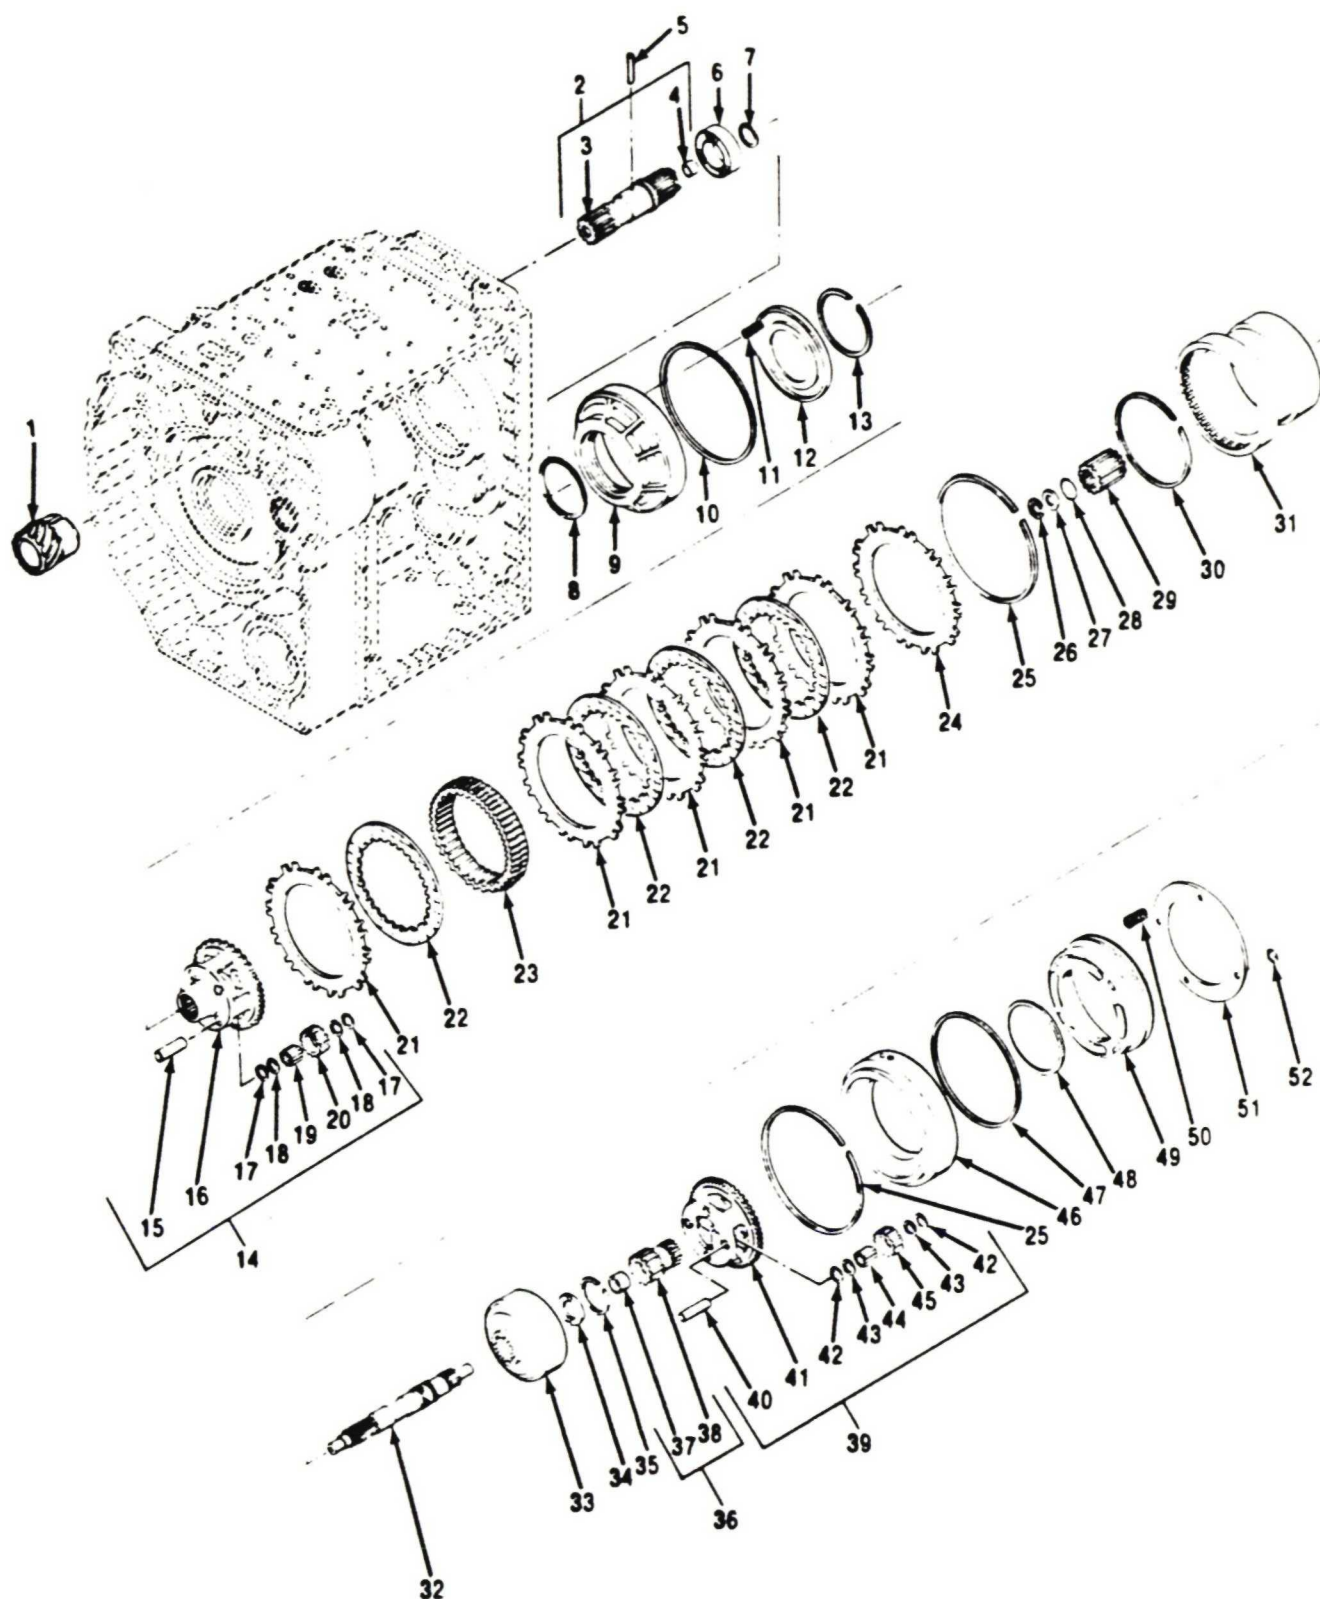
1st Clutch, Center Carrier and Rear Carrier
